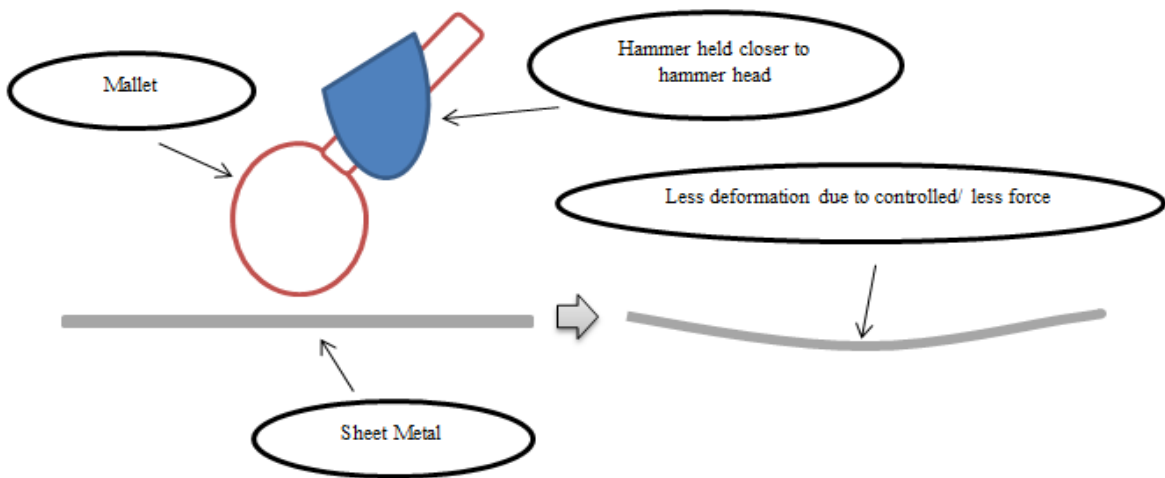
Deformation caused when the hammer is held closer to hammer head
